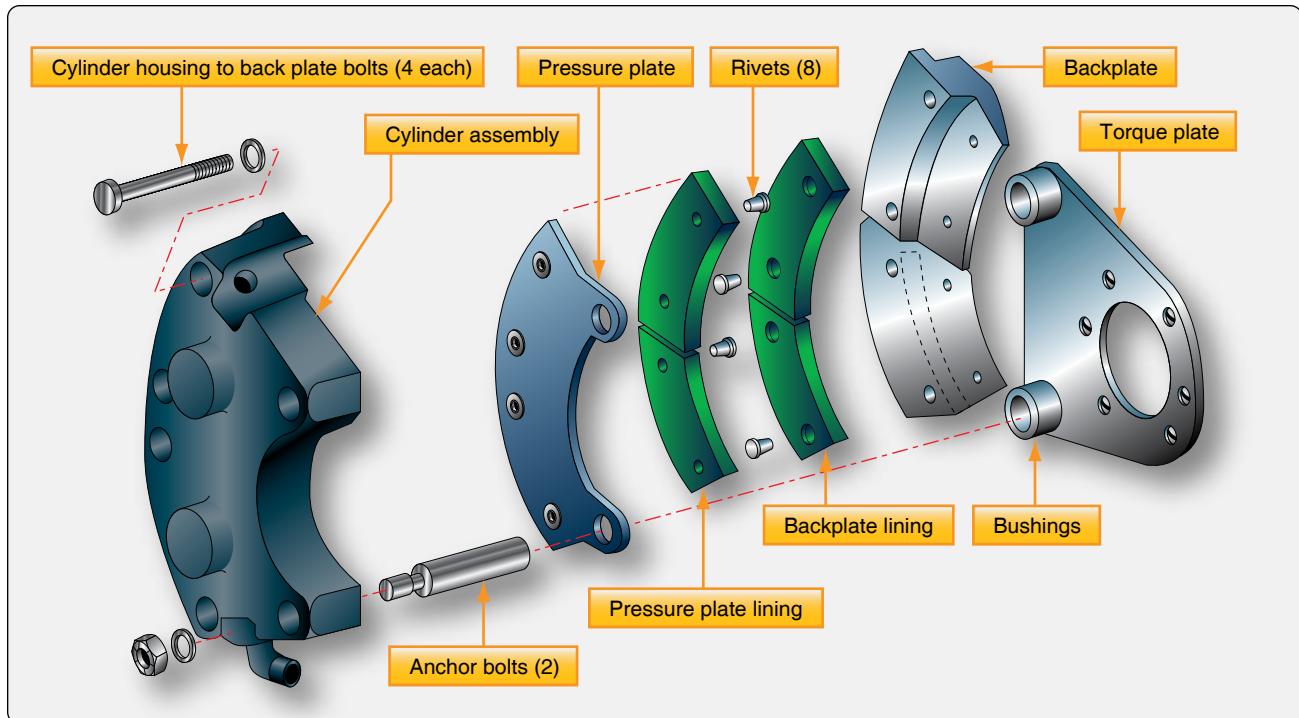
A Cleveland brake disassembles once the four bolts holding the cylinder to the backplate are removed while the aircraft wheel remains in place. The pressure plate slides off the anchor bolts and linings can be replaced by riveting on the pressure plate and back plate.
